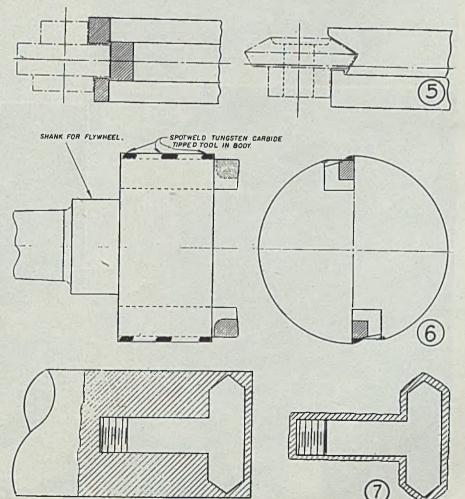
(left) Form tool made in three parts with brazed tips of high speed tungsten carbide or cast tool steel. (right) Bevel gear form tool in two parts, high speed steel
